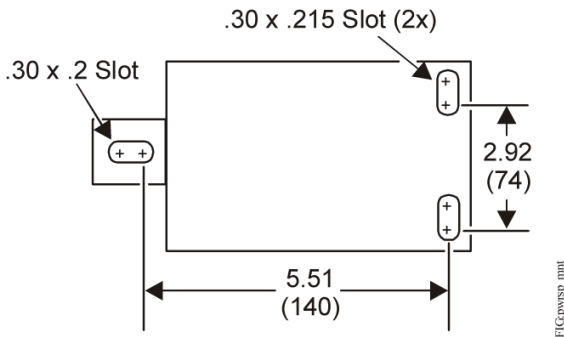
Power Supply Mounting Dimensions, in. (mm)
